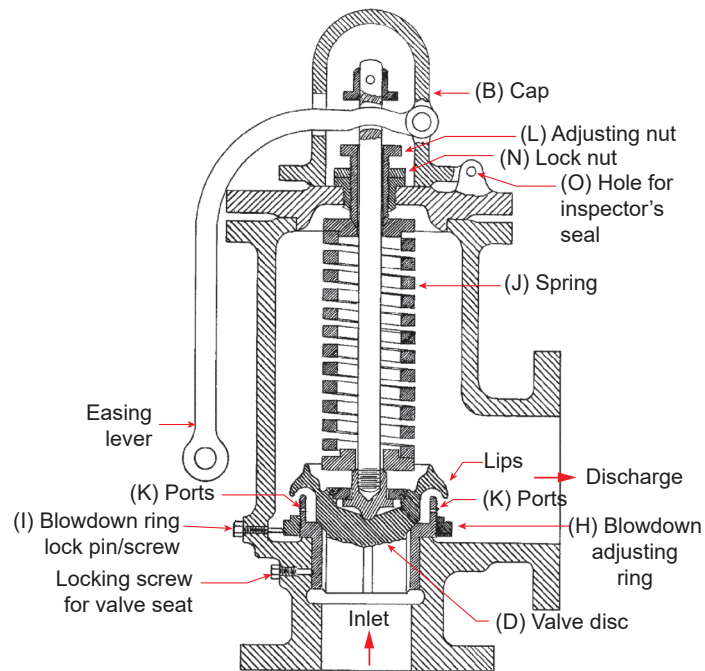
shows the construction of a safety valve. The safety valve is attached to the drum at the top of the steam space. The valve disc “D” is held firmly on its seat by the pressure of the heavy coil spring “J”. Screwing the nut “L” up or down adjusts the point at which the valve will lift and relieve the pressure. This will decrease or increase the compression of the spring “J”. Tightening lock nut “N” prevents the nut “L” from shifting. When the valve has been set by nut “L”, the cap “B” is put in place. An authorized inspector passes a wire through hole “O”, and attaches a seal. This prevents access to the adjusting nut “L”.
